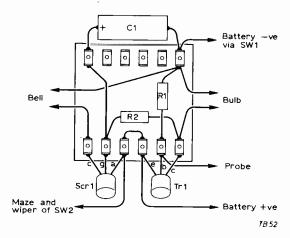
The electronic components are mounted on a small piece of tag board as shown.
